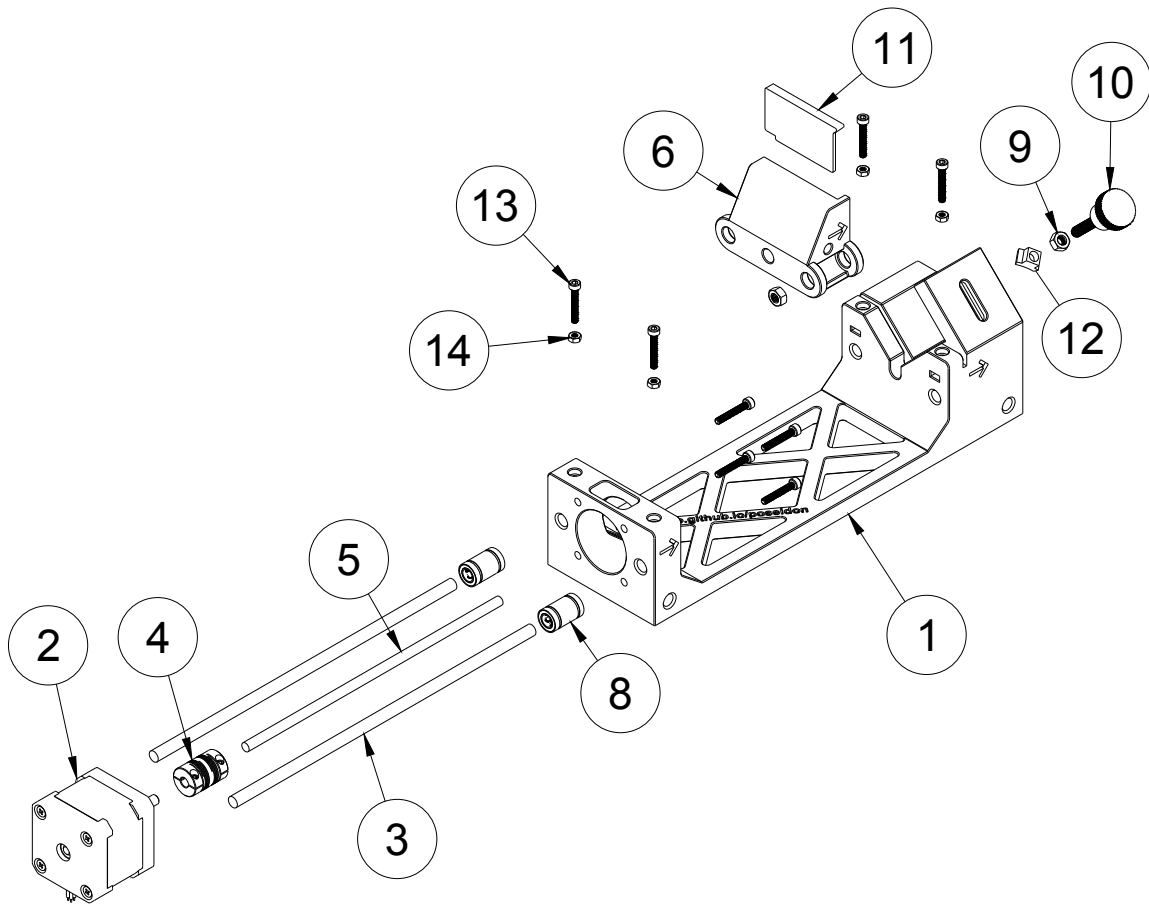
Parts list and exploded view of the poseidon syringe pump.
